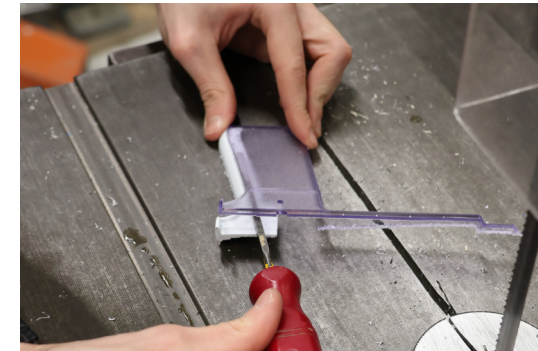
Trying to break through the glued parts with a flat blade screwdriver.
